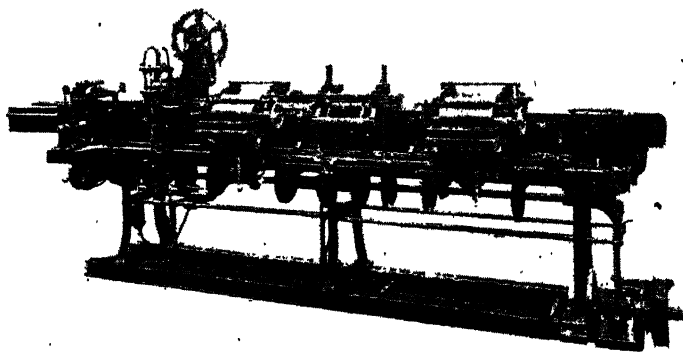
"MURRAY" FIRST AND SECOND LINING MACHINE.
